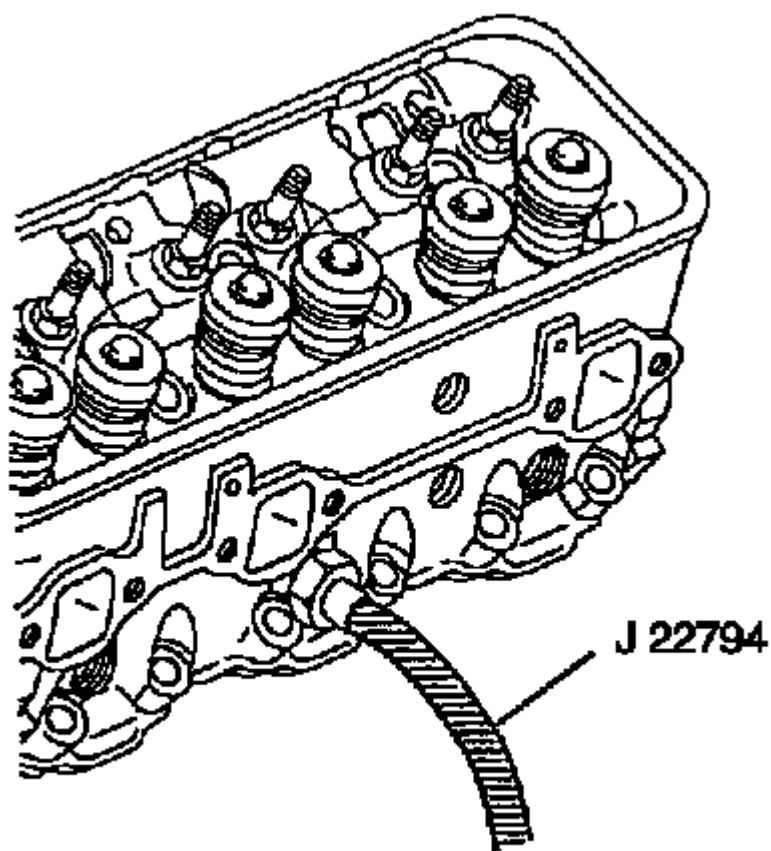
View Of Valve Stem & Valve Spring Components
